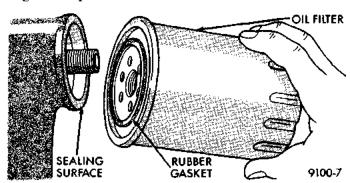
Oil Filter Sealing Surface—Typical USED ENGINE OIL DISPOSAL
